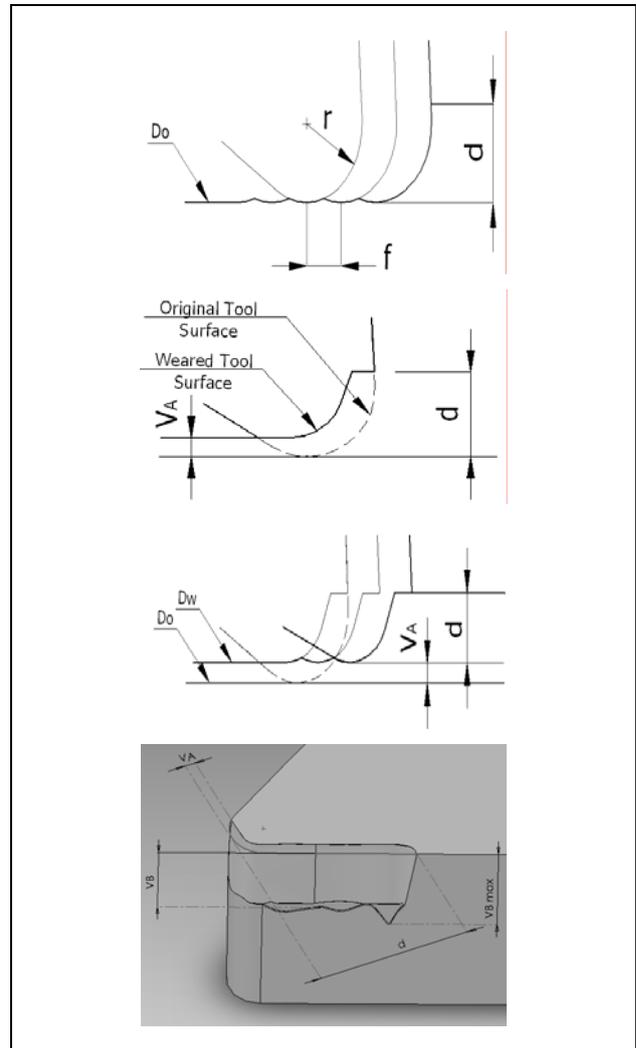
(a). The formation of the surface roughness with no wear sharp cutting tool (b) Tool Wear (c), Change of surface roughness and dimensional deviation after the tool wear propagate. (d) Simple wear propagation on single point cutting edge.
